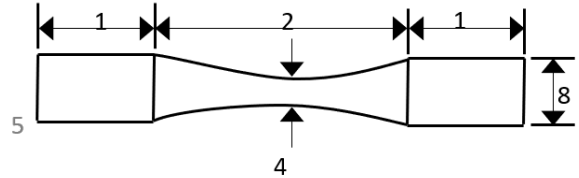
Fatigue Test Specimen (All dimensions in mm).
